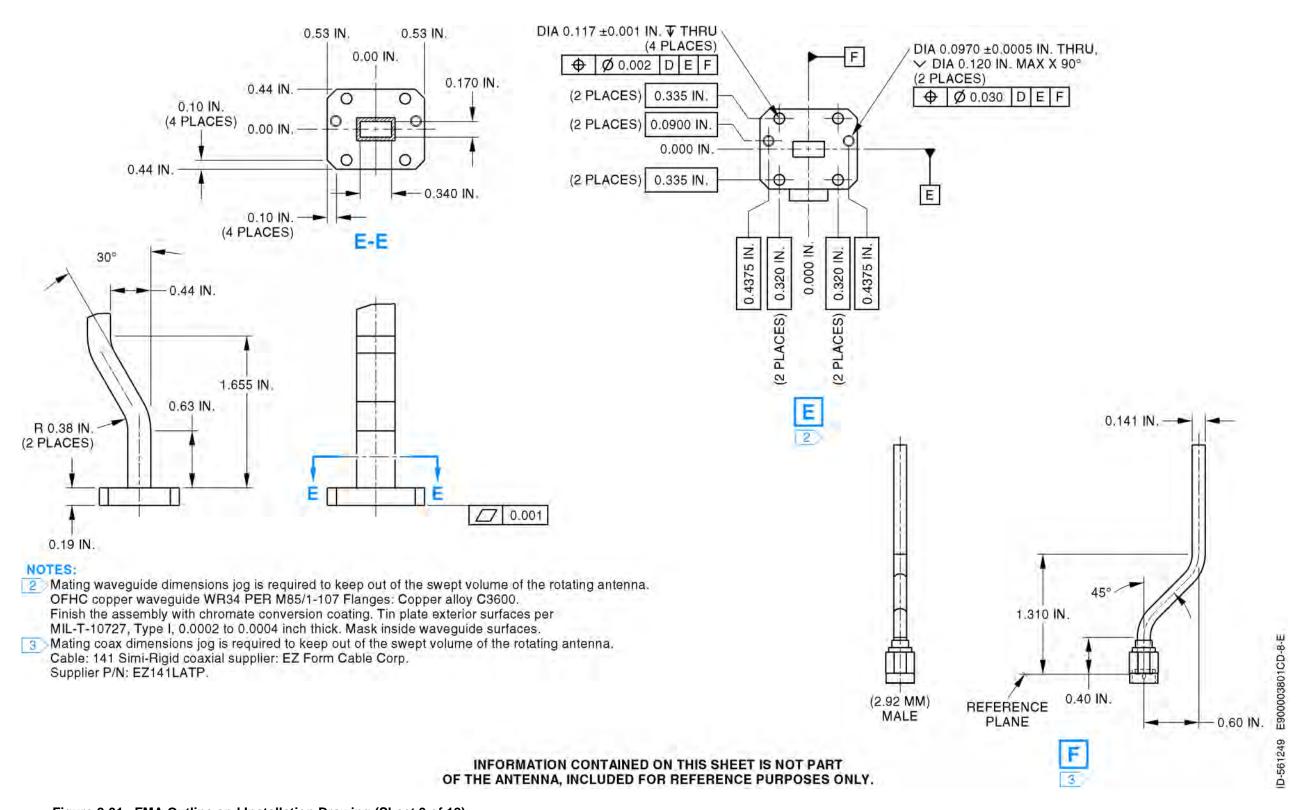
FMA Outline and Installation Drawing (Sheet 9 of 12)
